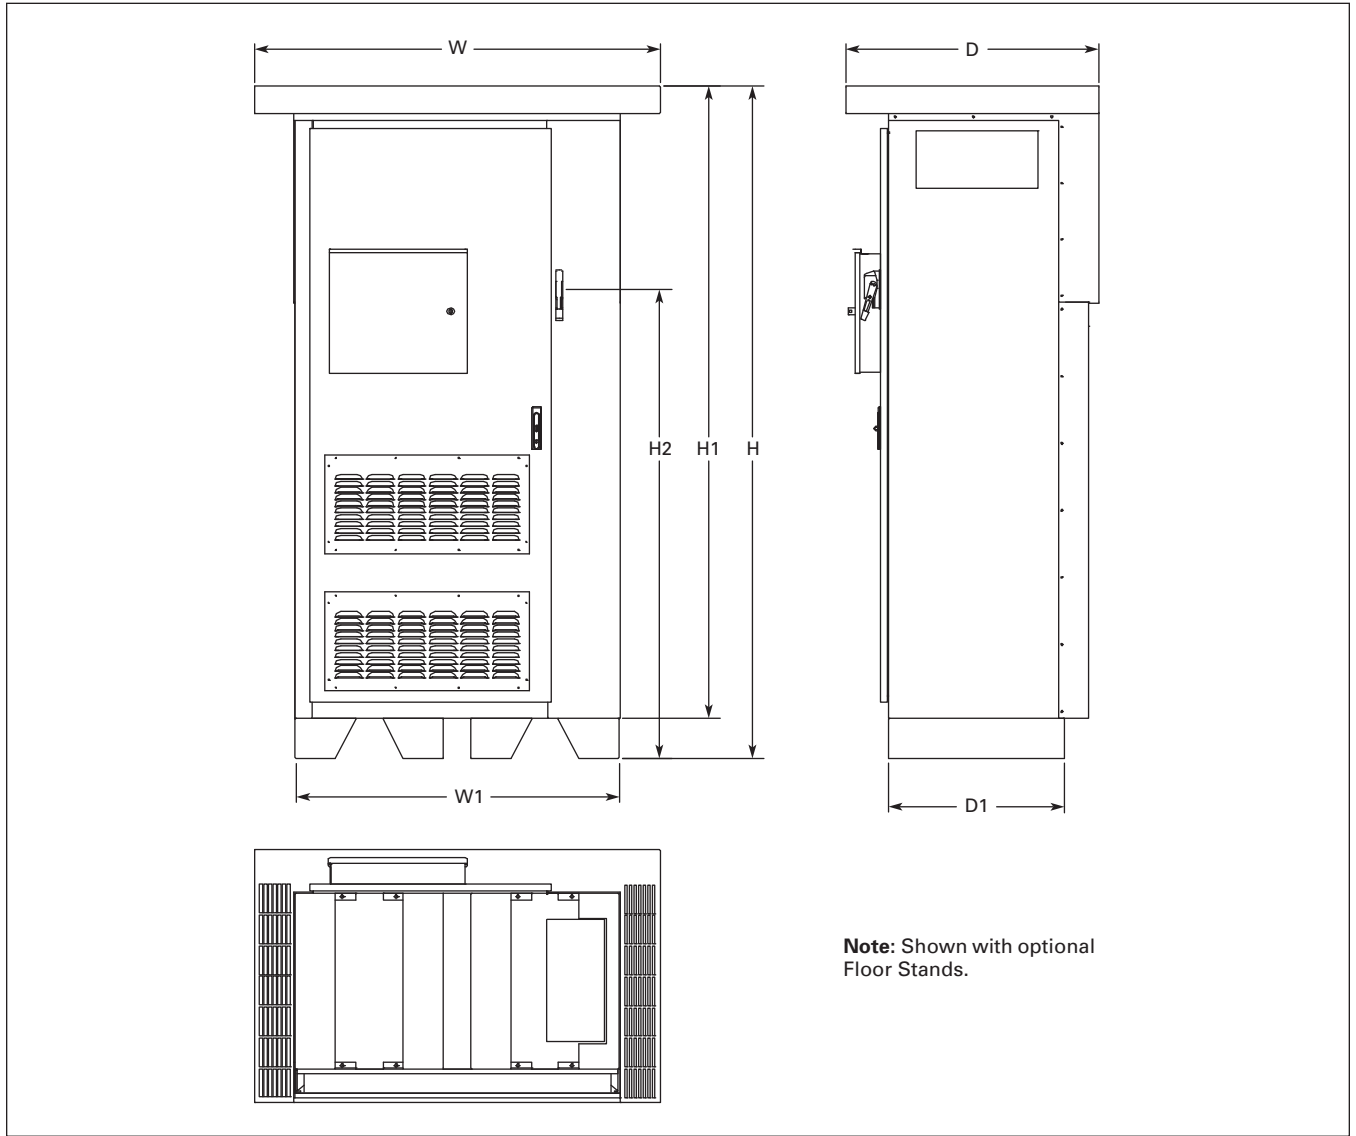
Enclosure Box E — UL Type 3R Dimensions
